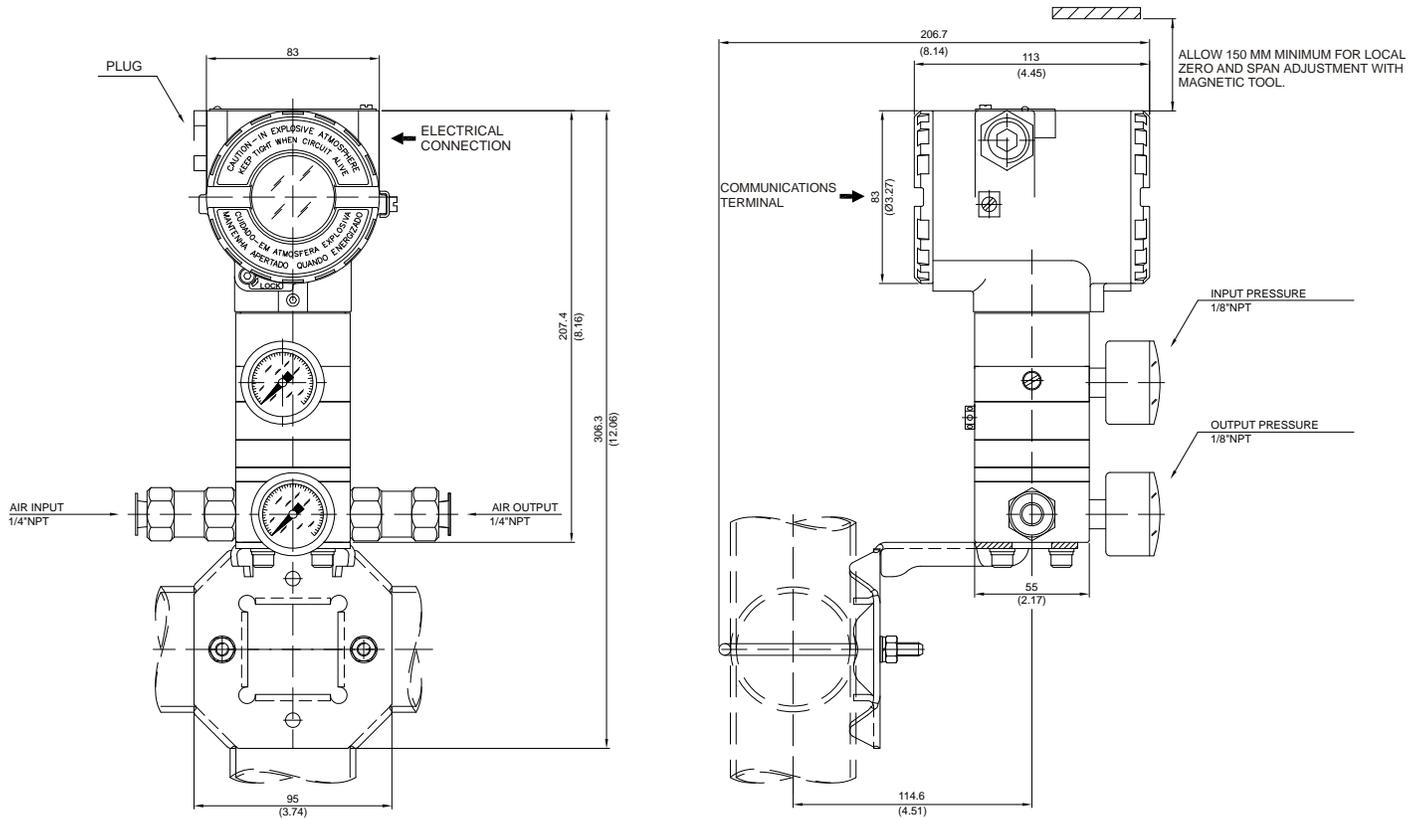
Converter Dimensional Drawing and Mounting Position
